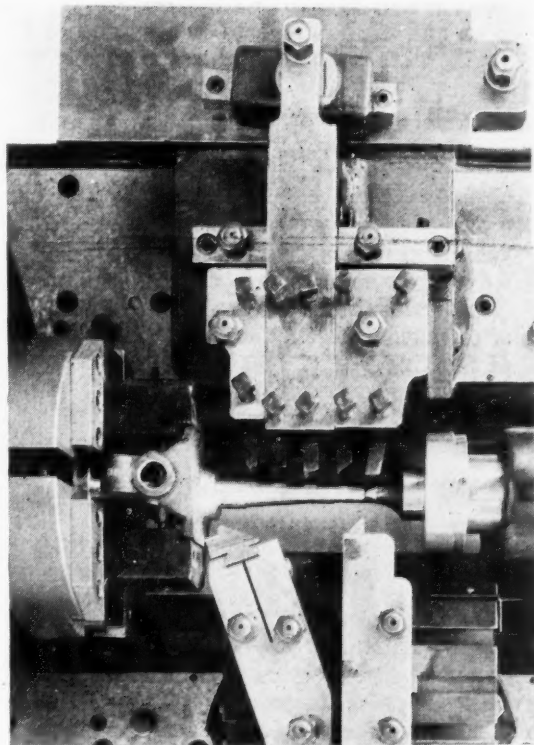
Seven tools perform all turning and facing operations on four-wheel brake knuckle spindle.
